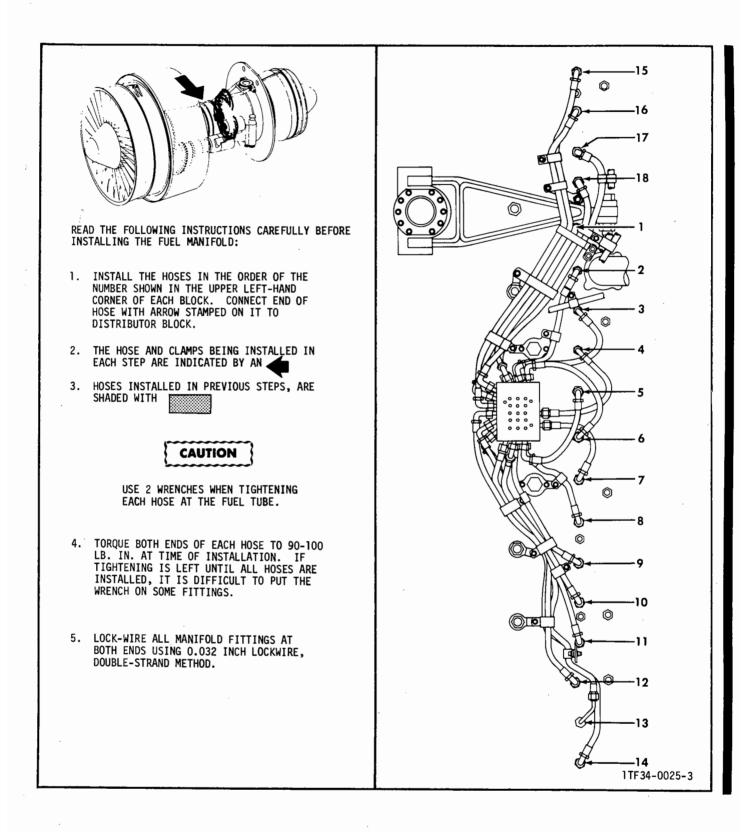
Fuel Manifold Installation (Sheet 1 of 6)
